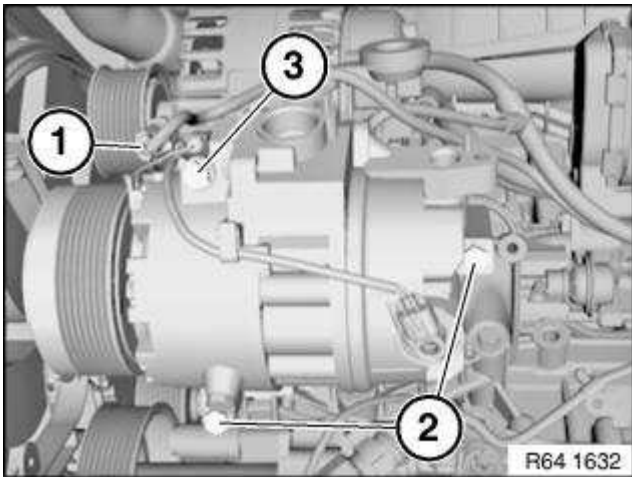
Release Screw (3) And Feed Out Compressor In Upward Direction
